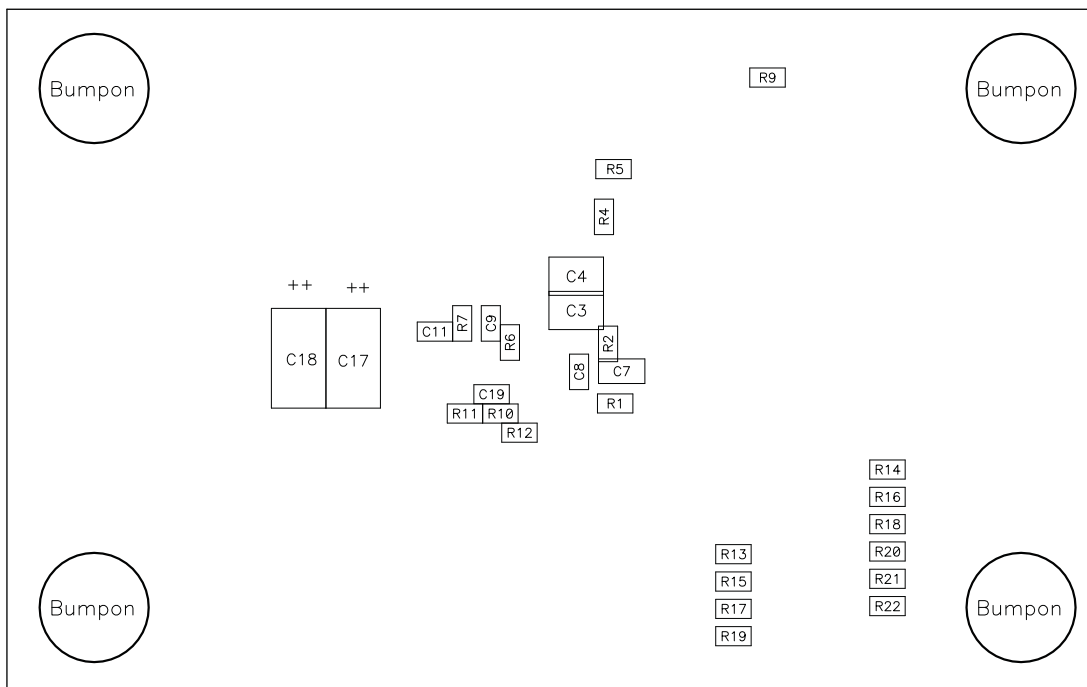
TPS53355EVM-864 Bottom Assembly Drawing
